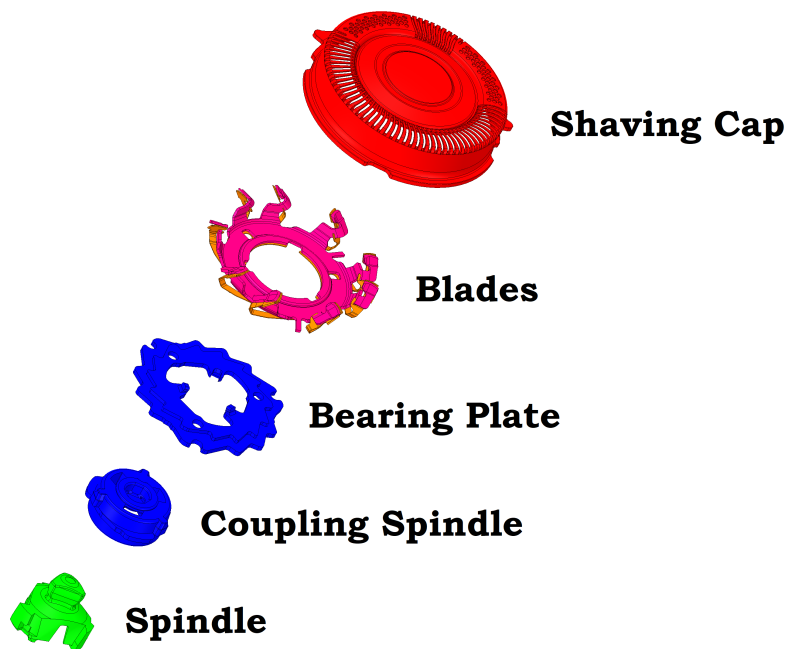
Exploded view of one of the shaver unit cutting systems
